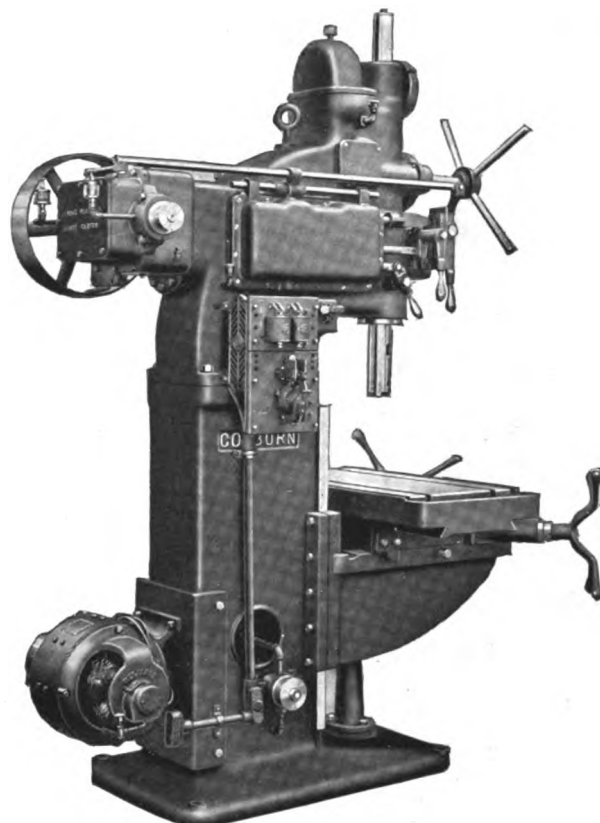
NO. 14 "STANDARD" HEAVY DUTY DRILL PRESS WITH MOTOR DRIVE, COMPOUND TABLE AND TAPPING ATTACHMENT
